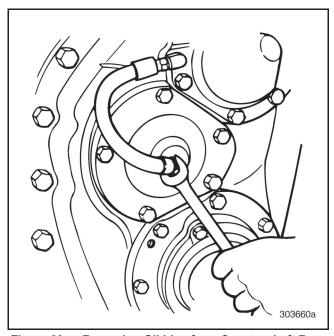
Removing Oil Line from Countershaft Rear Bearing Cover
